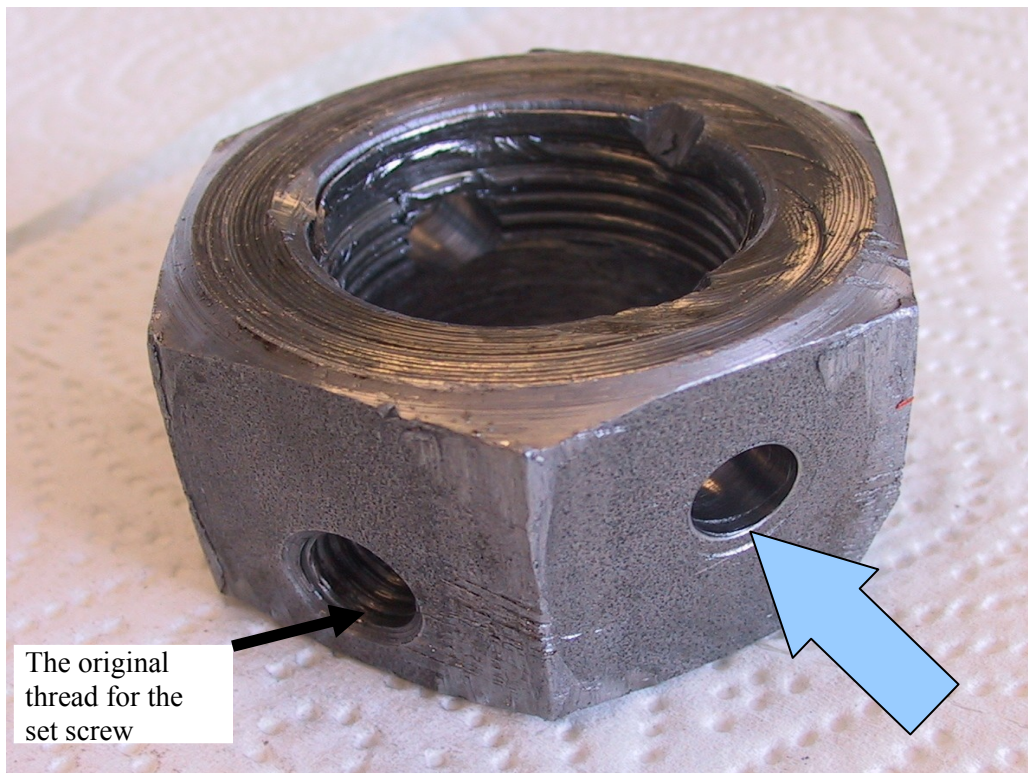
The hex nut was drilled through so that a bolt can be inserted to hold the rod and the nut together.
